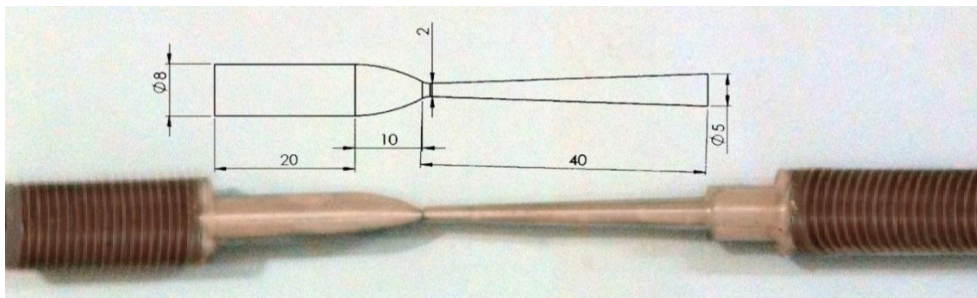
PHOTOGRAPH OF TOOLS FOR ELECTRO-DISCHARGE MACHINING OF DE-LAVAL NOZZLE
